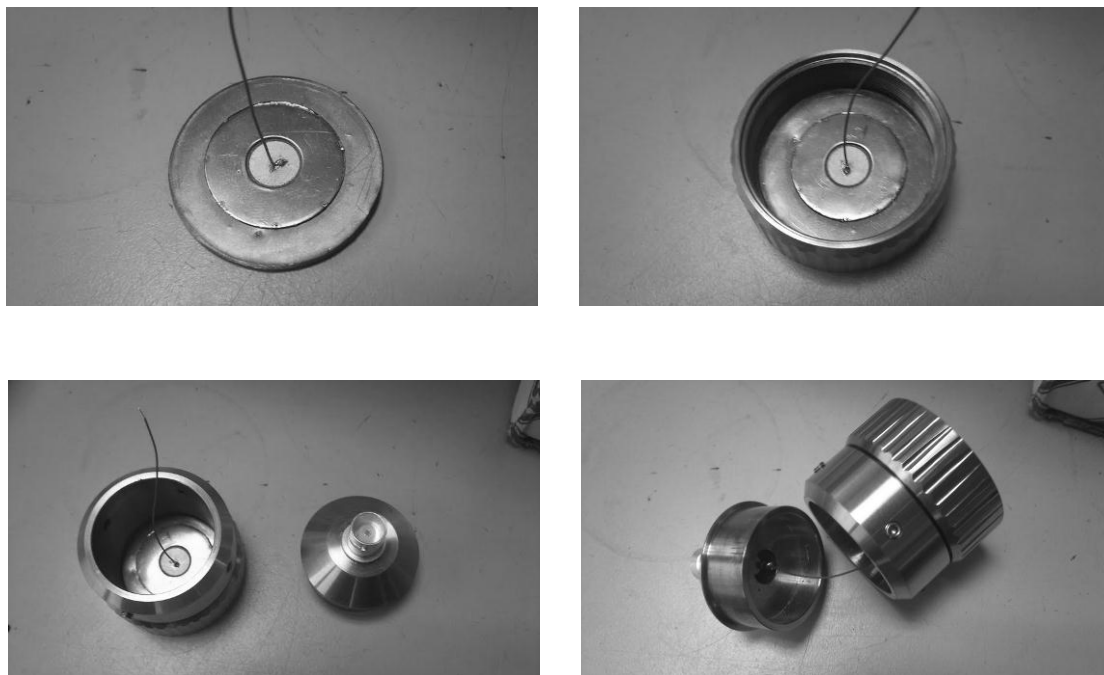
Transducer assembly process showing the fine wire soldered to the piezoelectric actuator.
